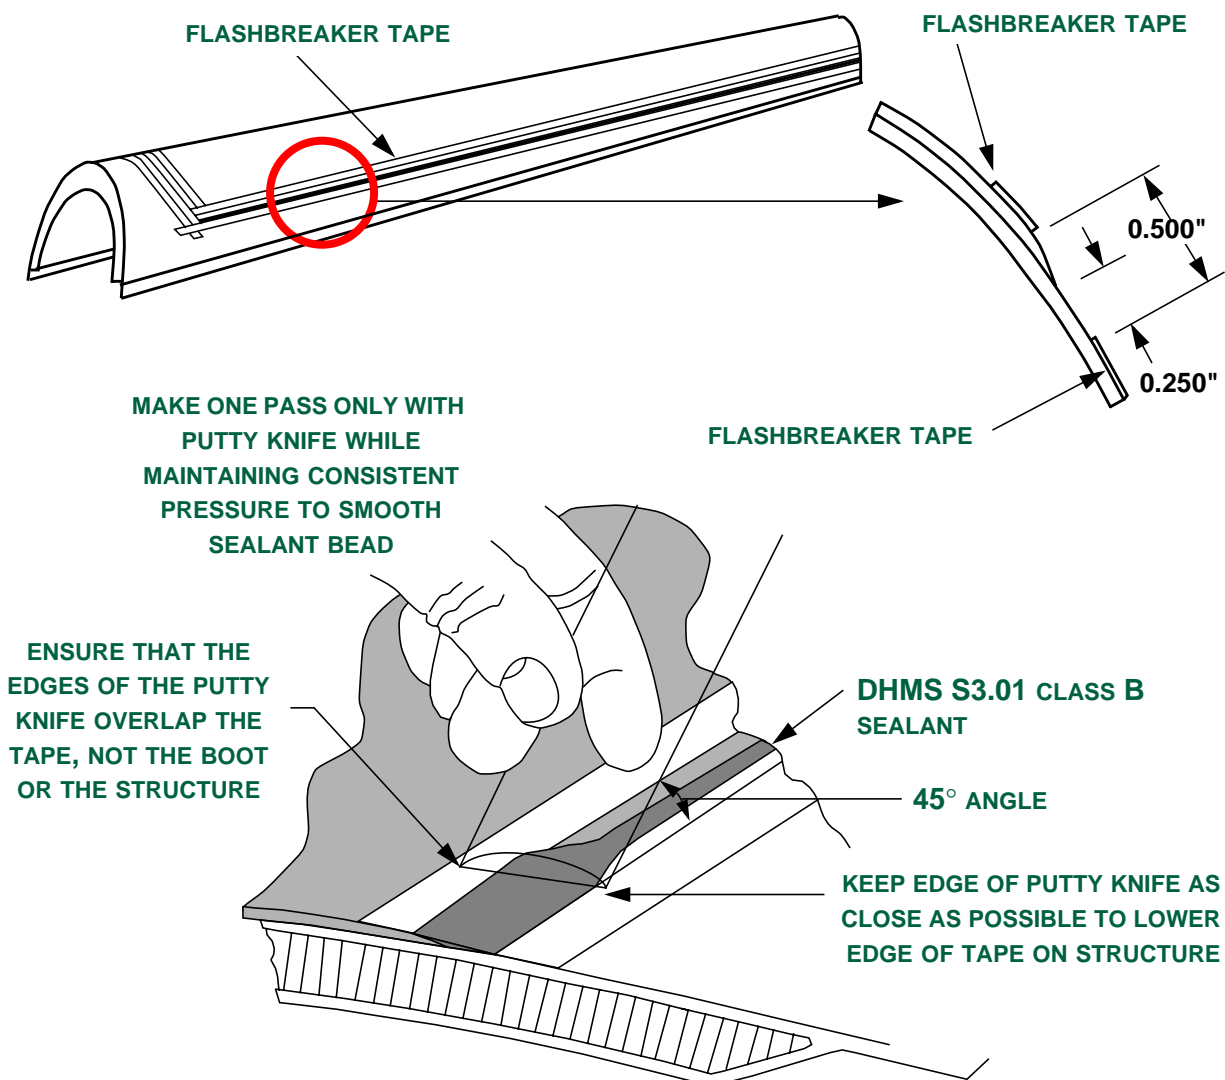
EDGE SEALING COLD BONDED DE-ICER BOOTS
